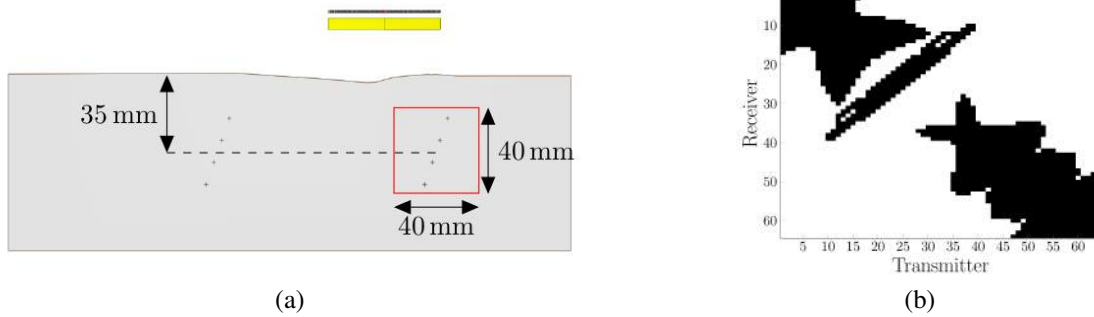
Levelled weld. (a) specimen geometry, (b) $K(t)$ matrix with a threshold at -6 dB.
